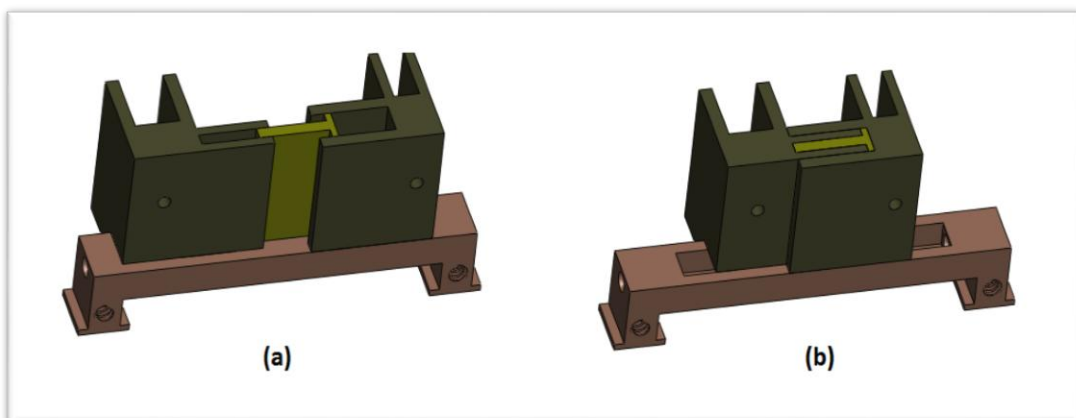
(a) The middle part is out of the L-part; (b) the tool is completely closed
